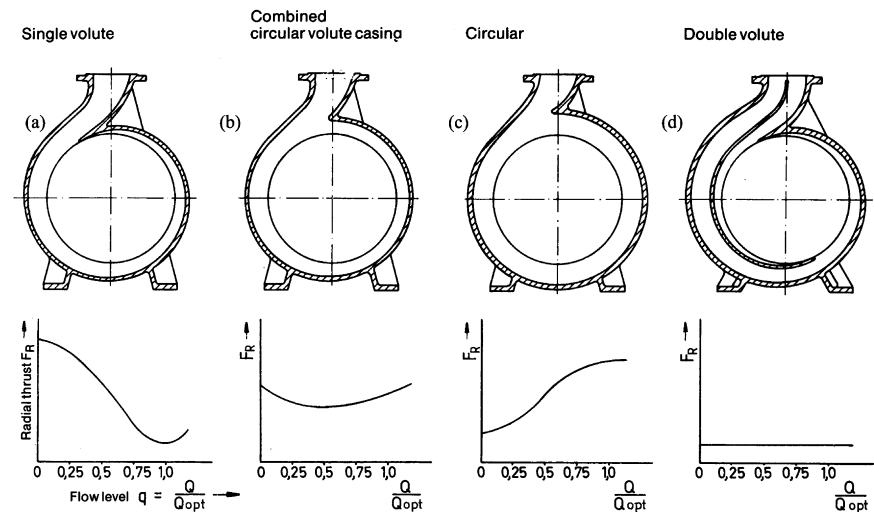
The shape of the volute casing and radial thrust [6]
